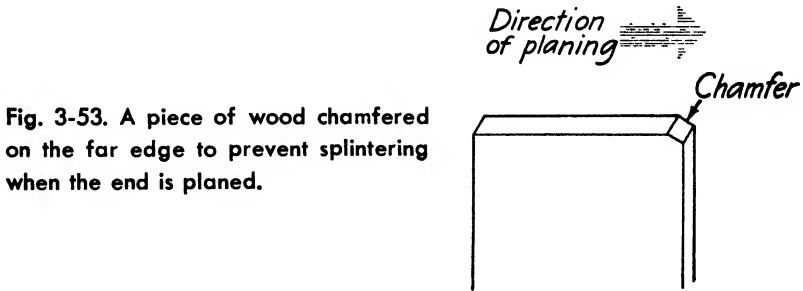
A piece of wood chamfered on the far edge to prevent splintering when the end is planed.
